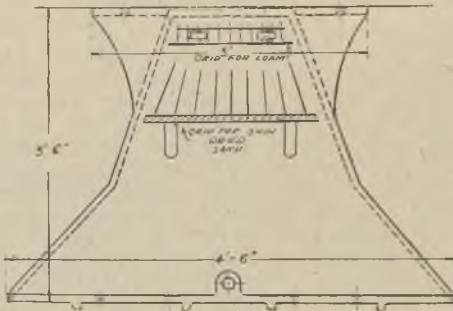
WHEN MADE IN LOAM IT IS MOULDED AS SHOWN, BUT WHEN MADE IN DRIED SAND THE JOB IS INVERTED.
